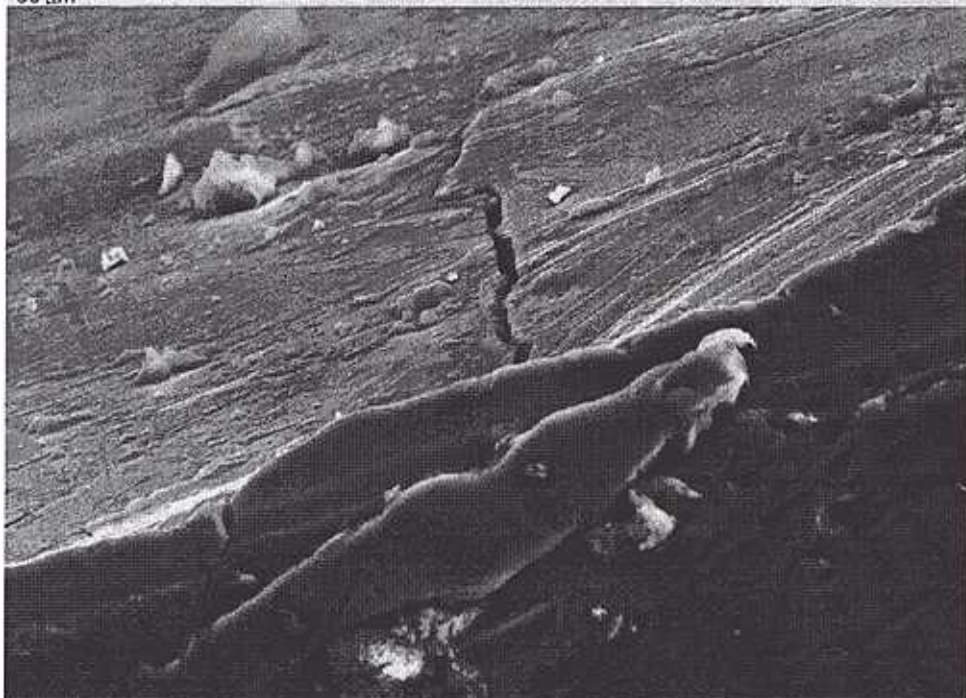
287 Hole 1 The crack has opened up on the hole surface.
